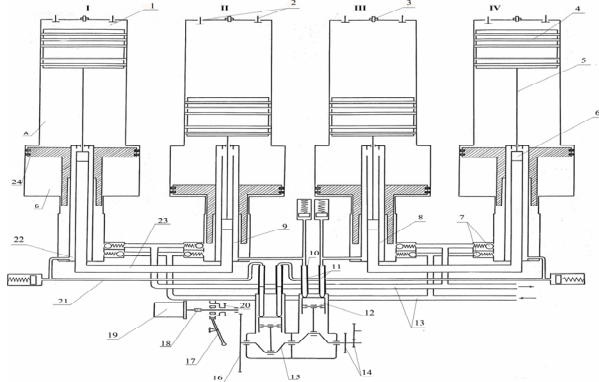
Free-piston inner combustion engine with hydraulic starter [2, 9]: 1 – cylinders; 2 – inlet and exhaust valves; 3 – nozzles; 4 – working pistons; 5 – stocks; 6 – plungers; 7 – exhaust and inlet hydraulic valves; 8, 9 – cylinders of starting system synchronization; 10 – shell cases; 11 – plungers; 12 – pistons; 13 – pipelines; 14 – gas distributor shaft gear of the FPICE systems and mechanisms; 15 – crankshaft of the starter; 16 – drive gear; 17 – connection lever of the clutch; 18 – elastic clutch; 19 – starter; 20 – clutch; 21 – oil pipelines; 22 – windows of piston synchronization system; 23 – hydraulic connection; 24 – pump piston; A, Б – capacity of gas drive-gear
